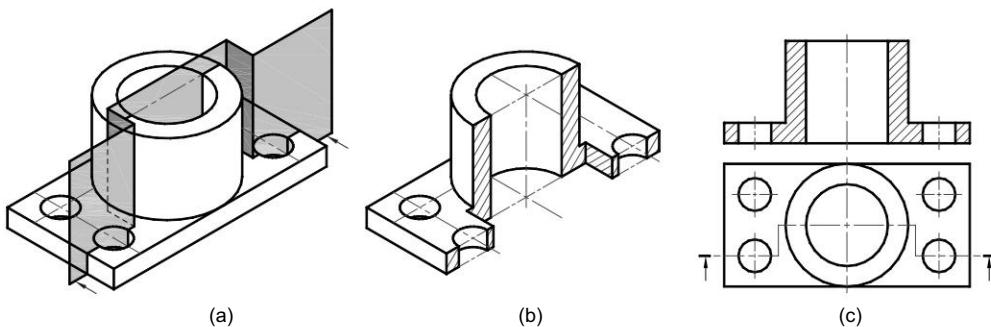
Object (a) Pictorial view (b) Cut by offset sectional plane (c) Sectional front and top views
